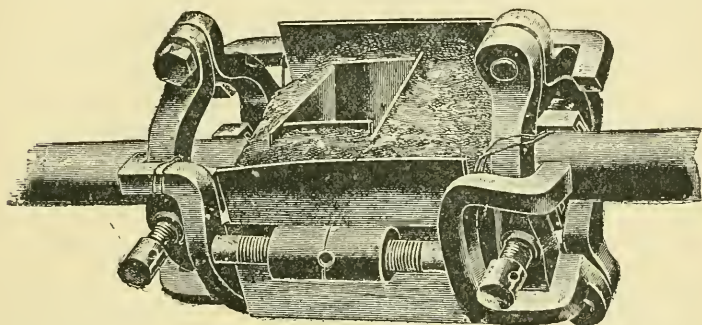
Casing packed round with moulding sand in readiness for the welding operation.
